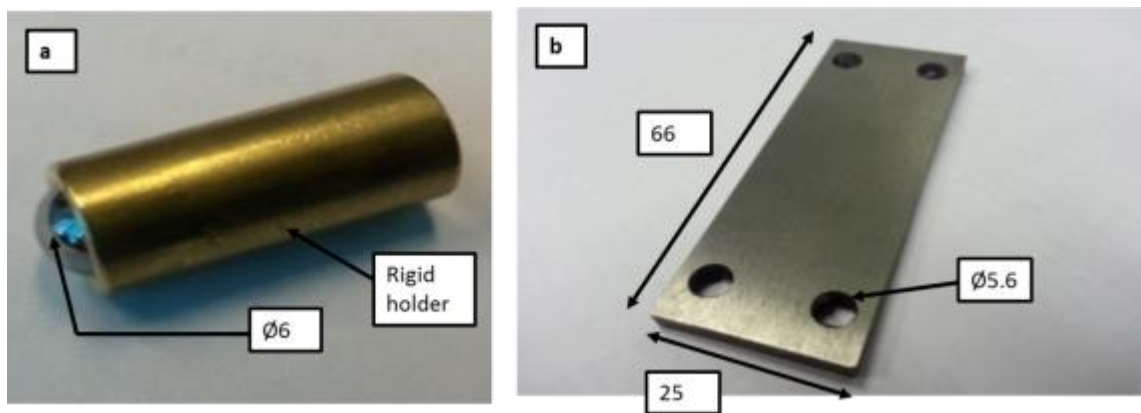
Pictorial view of (a) ball with rigid holder and (b) flat friction coupon. All dimensions in mm.
